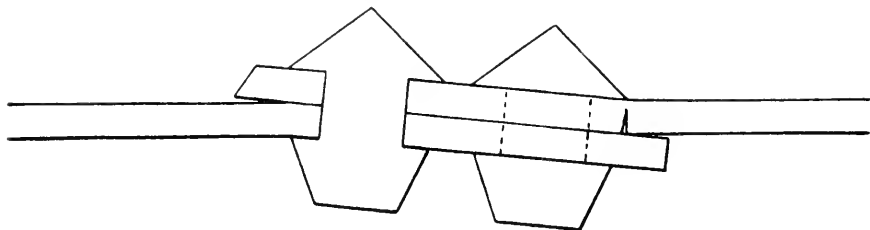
ILLUSTRATING THE FLEXURE OF THE PLATE NEAR A LAP-RIVETED JOINT.
